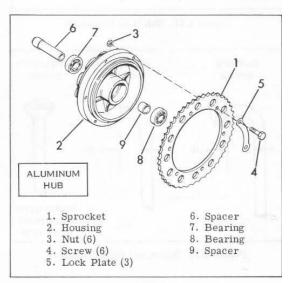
Removing and Installing Rear Wheel Sprocket Assembly - Aluminum Hub
